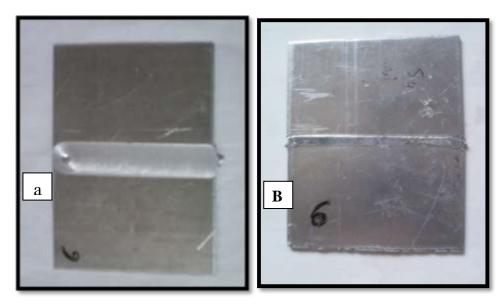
Configurations FSW welded plates a- The top side of butt welded plates b- The back side of butt welded plates.
